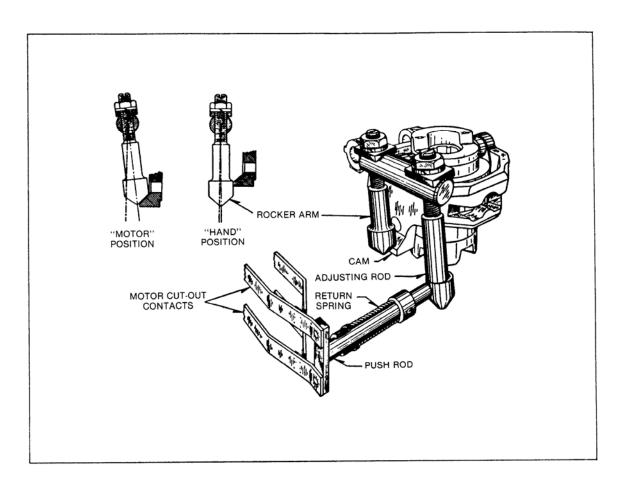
Motor Cutout Contact Assembly (M-23A and M-23B Machines)
